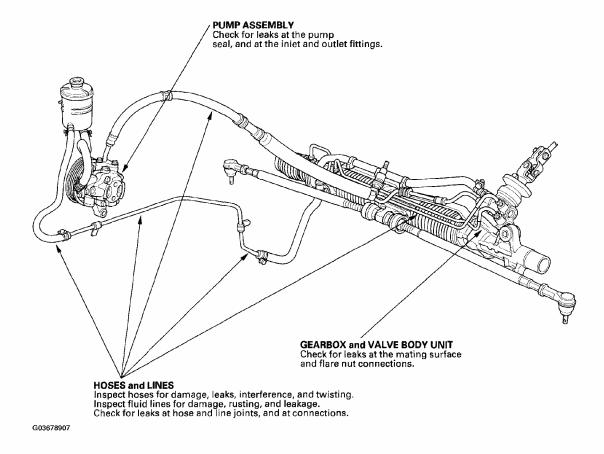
Identifying Power Steering Fluid Leakage Components Courtesy of AMERICAN HONDA MOTOR CO., INC.
